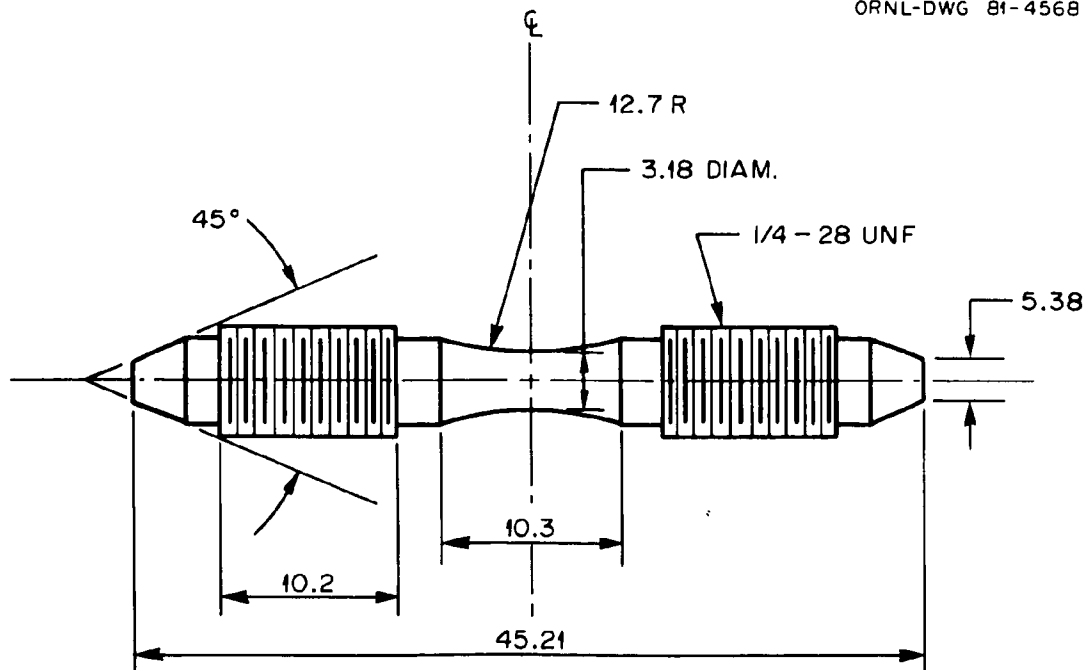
Hourglass fatigue specimen; all dimensions are in millimeters.
